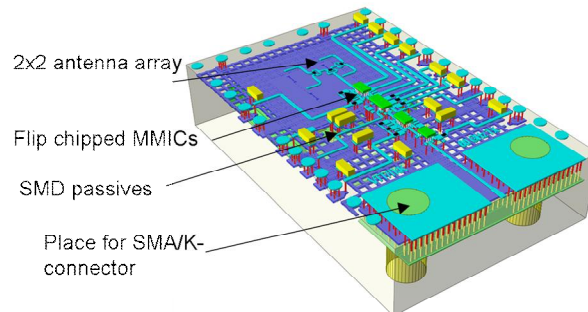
3D-layout drawing of a 60 GHz transmitter module on LTCC showing integration capabilities of the LTCC technology. The multi-chip module has integrated antennas, flip-chipped MMICs and SMD passives and place for a connector with through module interconnection holes.
